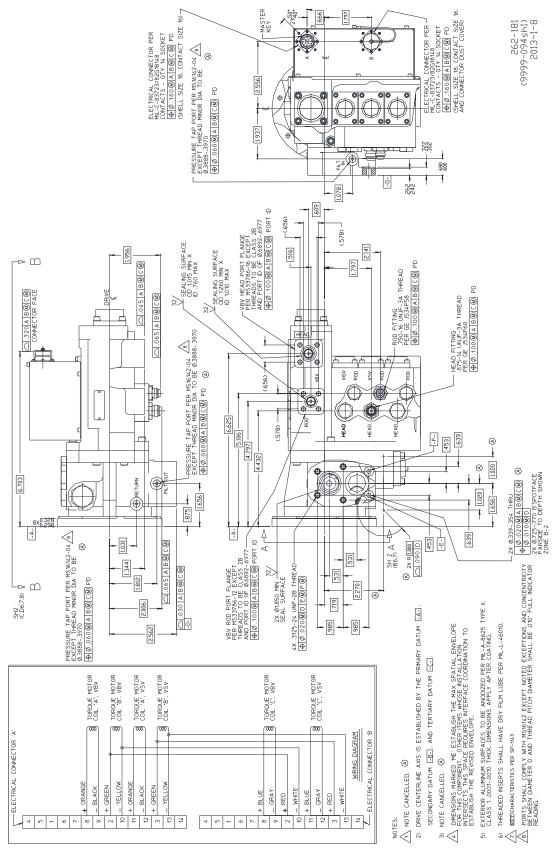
Outline Drawing of 9902-701 HCU (2 channel)
